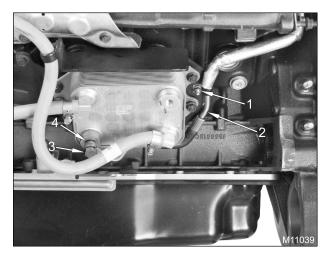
High-pressure pump to cooler tube assembly (lower connection)
